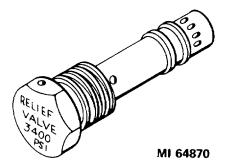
Elevation actuator cylinder relief valve 9089718.
